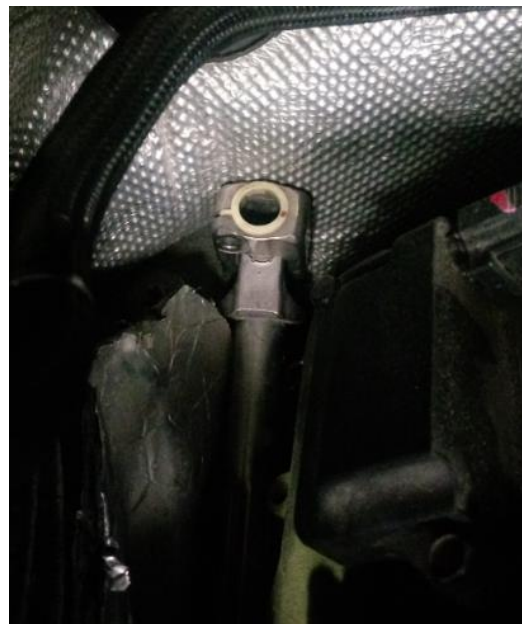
Steering Shaft to Steering Rack Top Unit after
